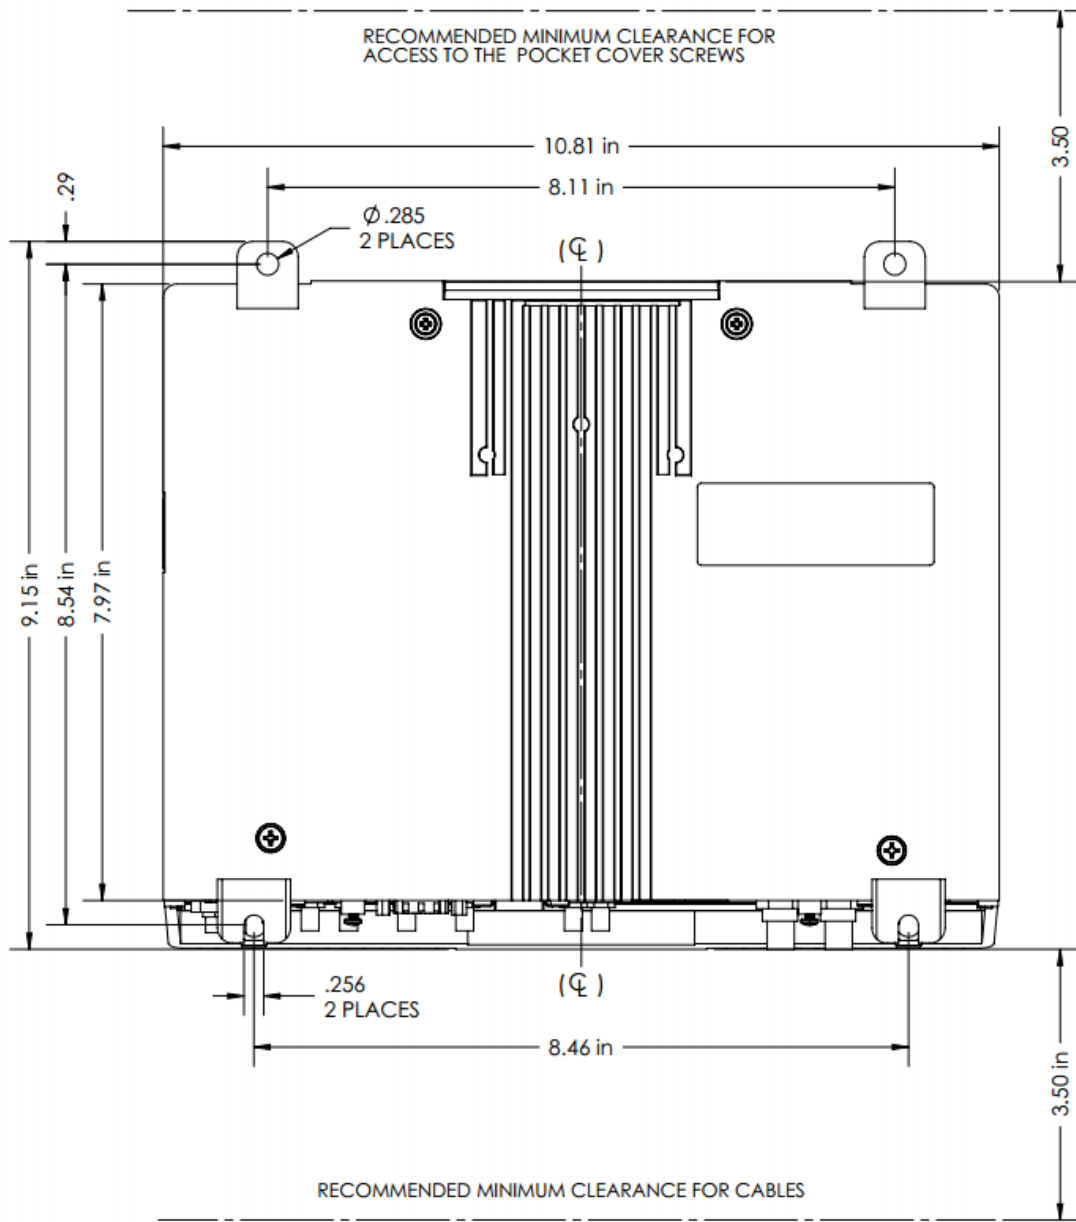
Base Unit Bottom View—Dimensions and Clearances
